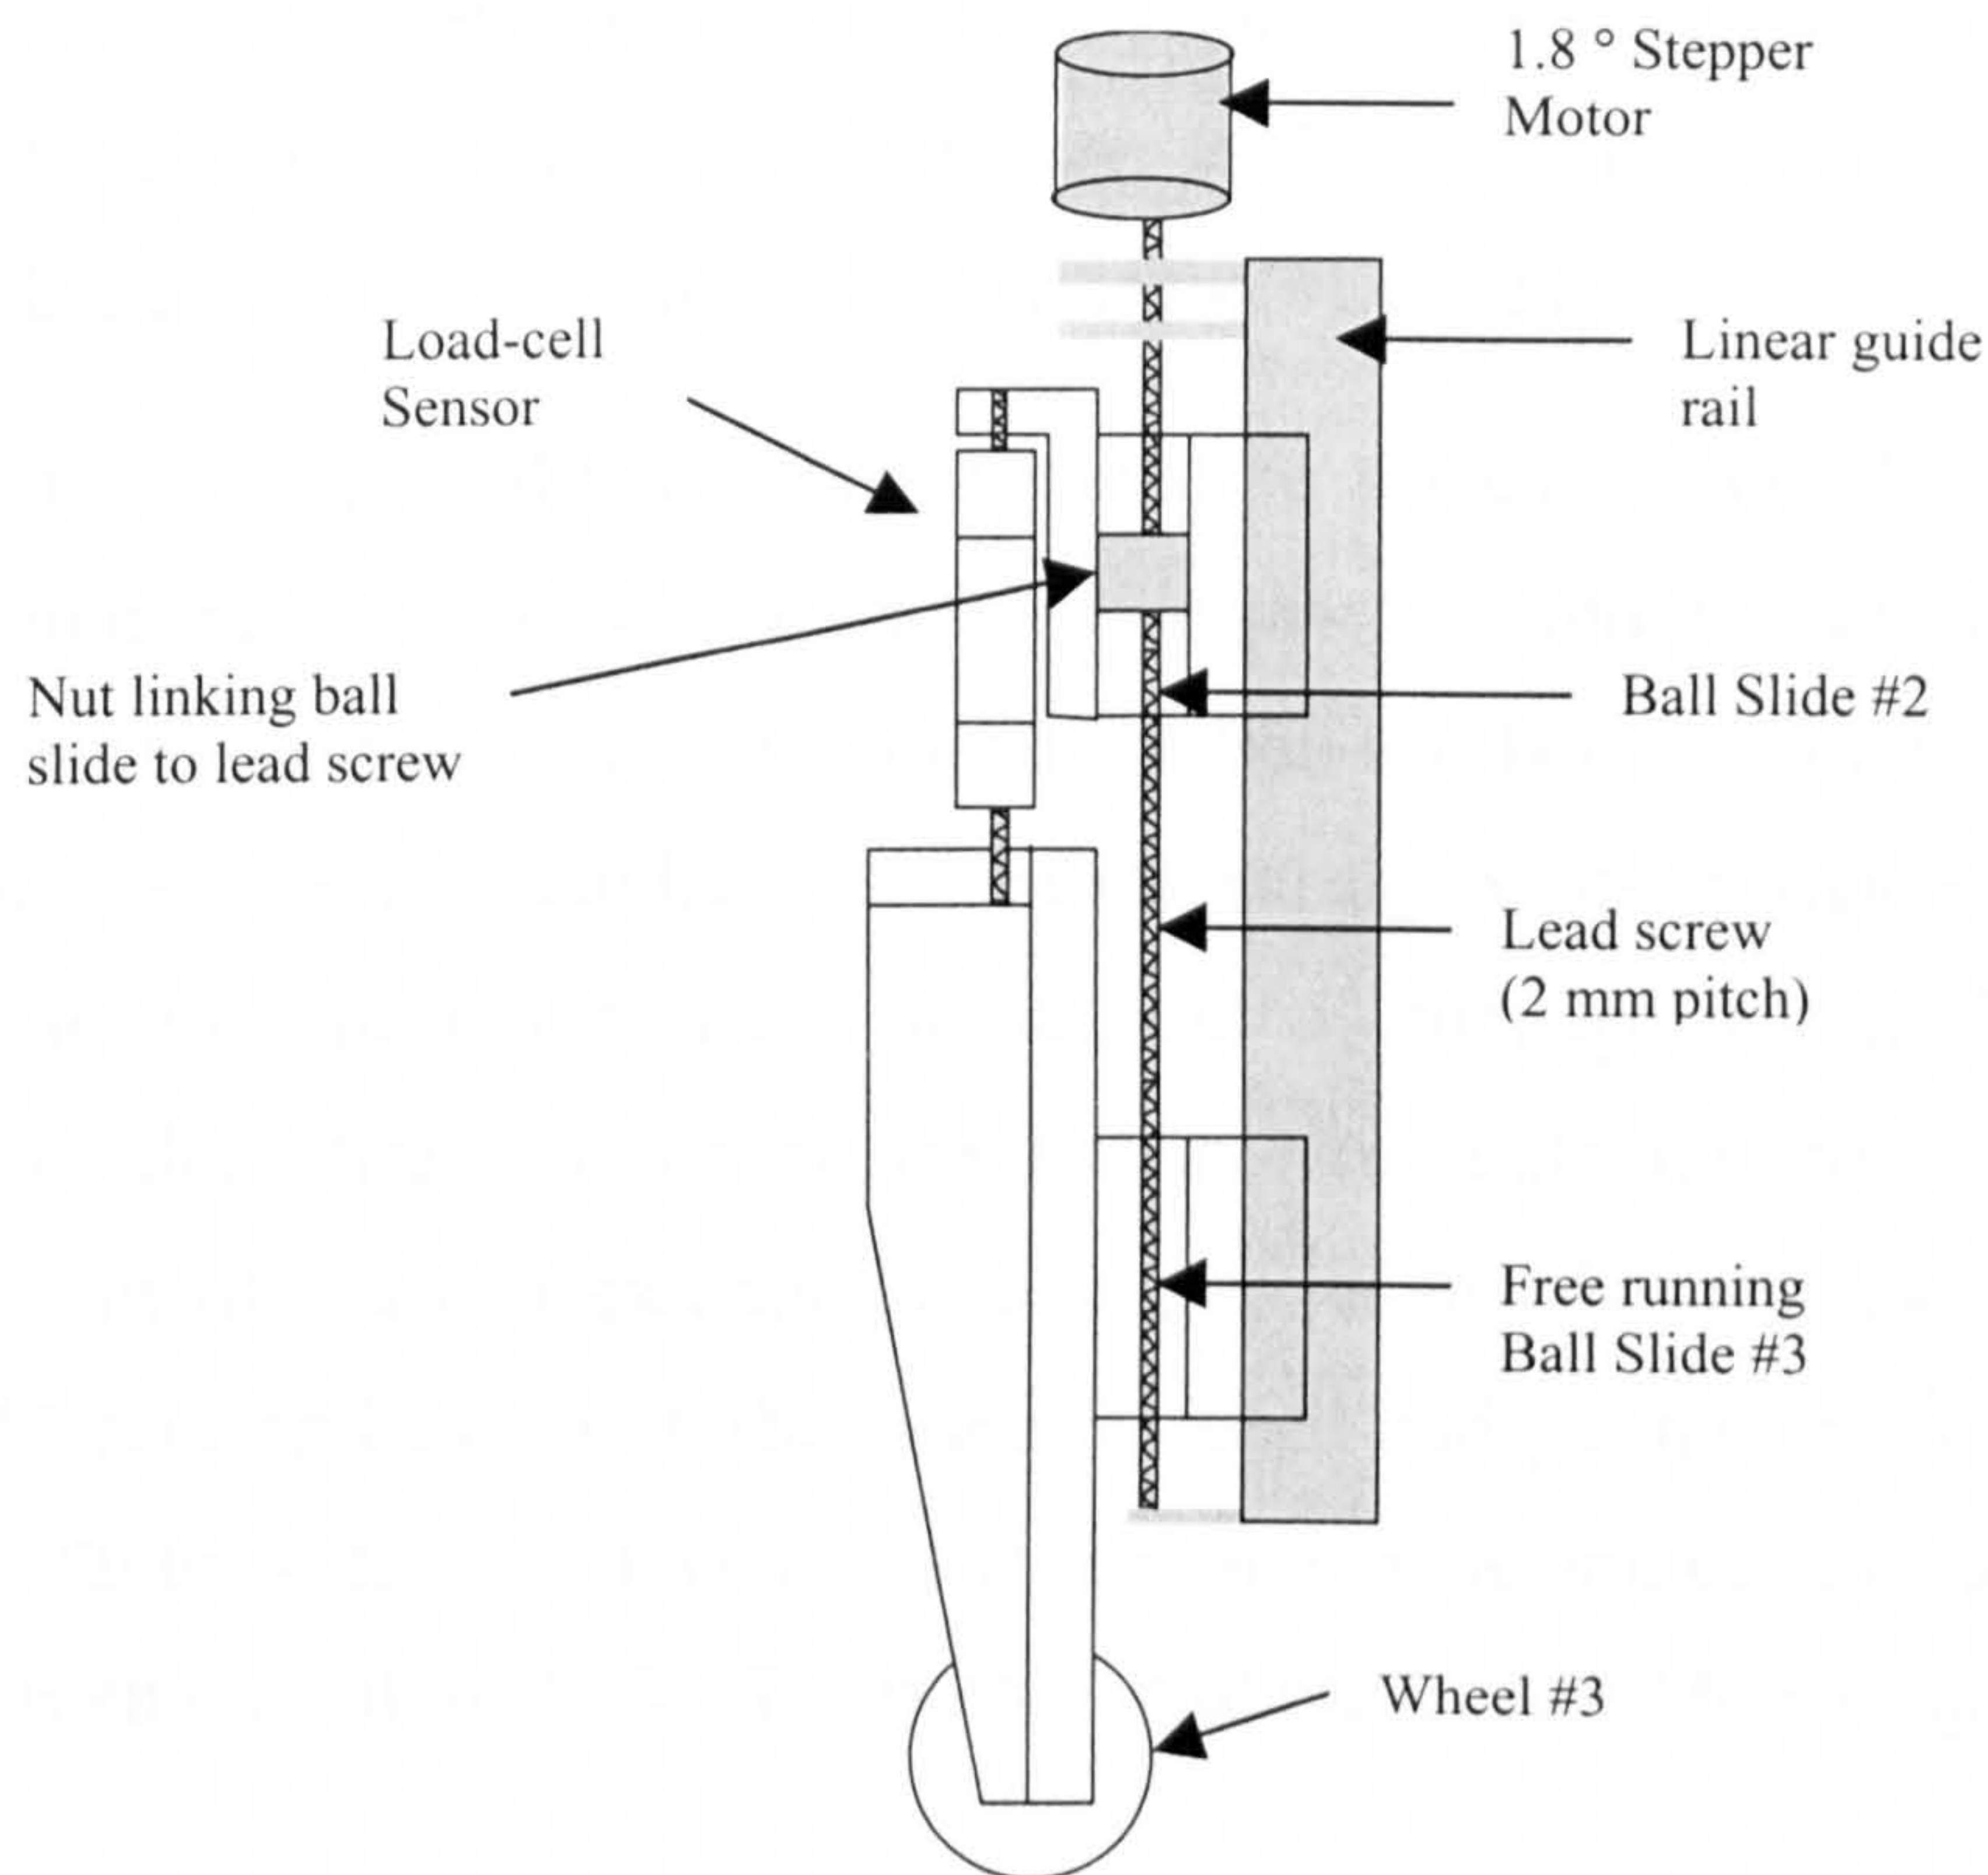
Sketch of a sectional view of Wheel #3 unit.
